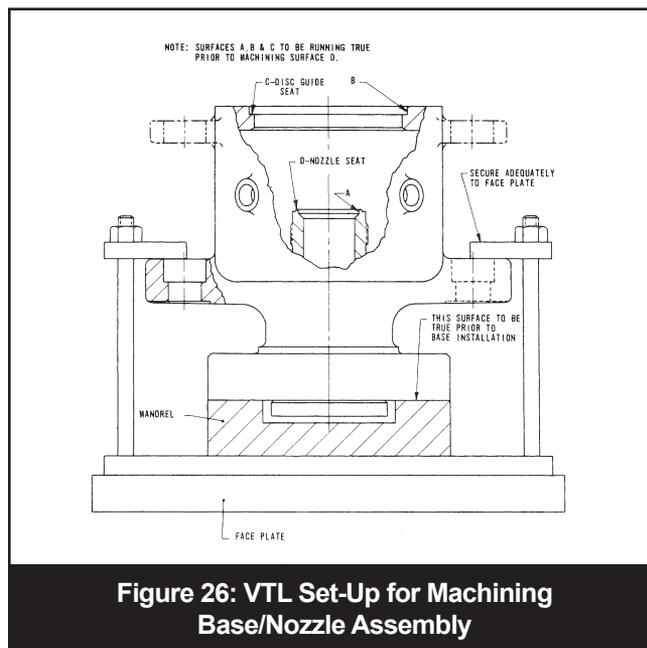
VTL Set-Up for Machining Base/Nozzle Assembly
